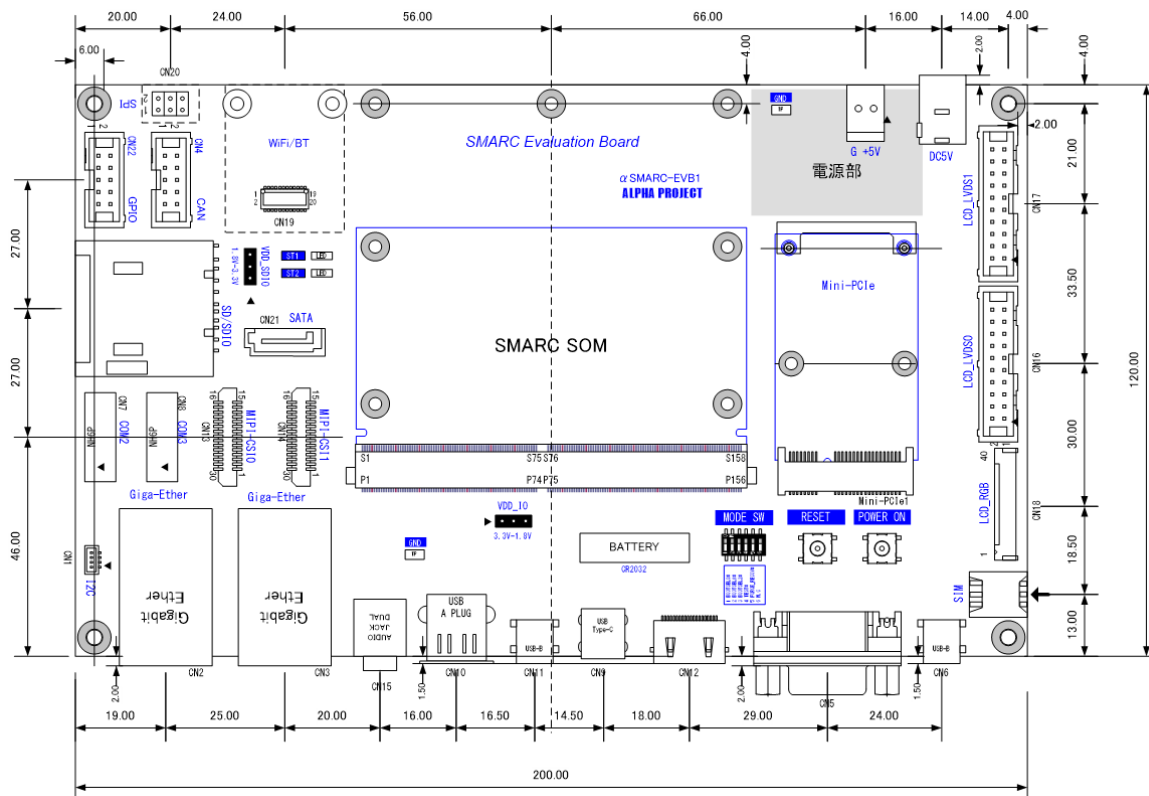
αSMARC-EVB1 dimensional drawing
